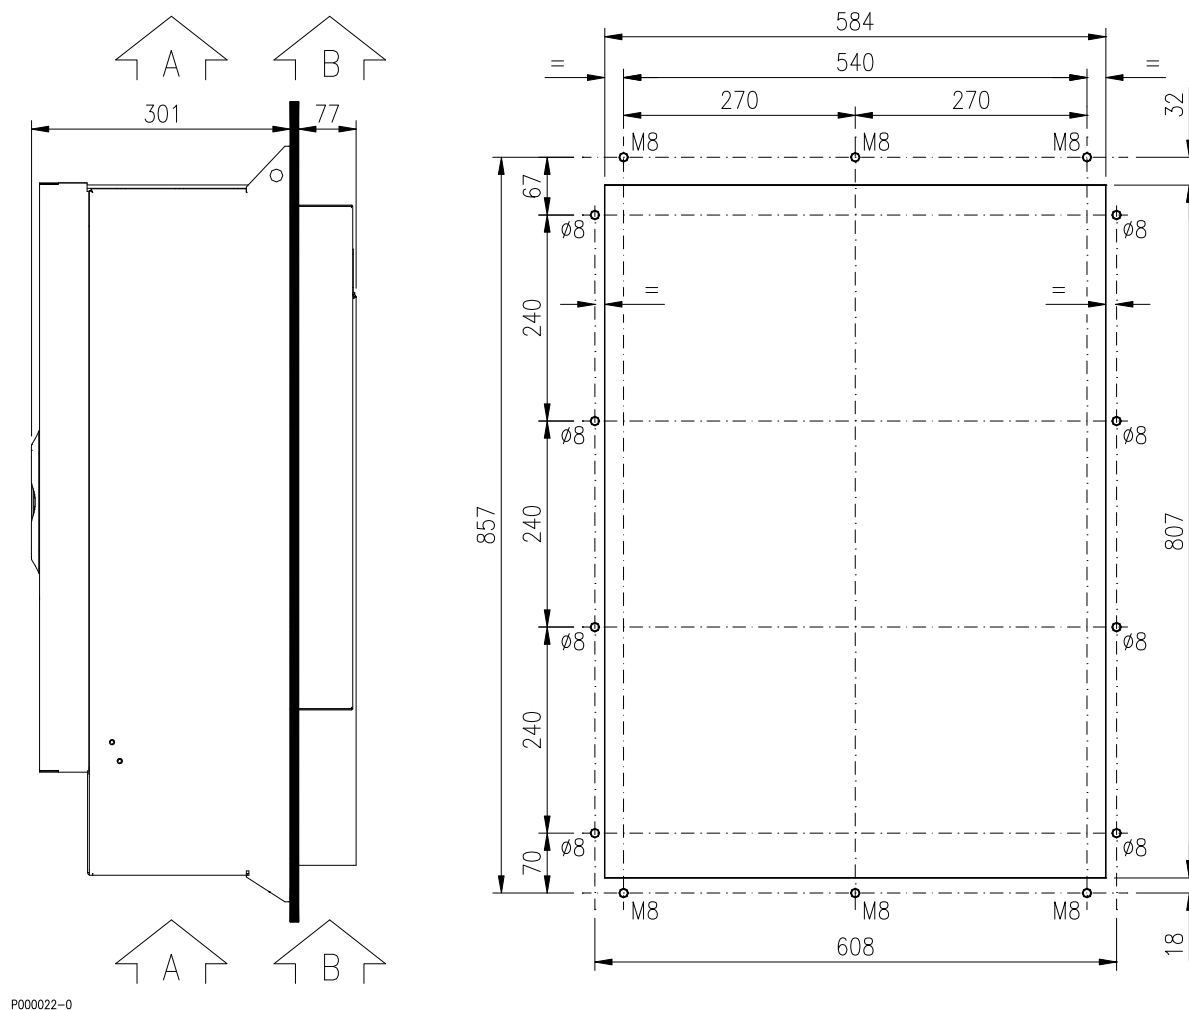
Through-panel assembly and piercing templates for SINUS PENTA S40
